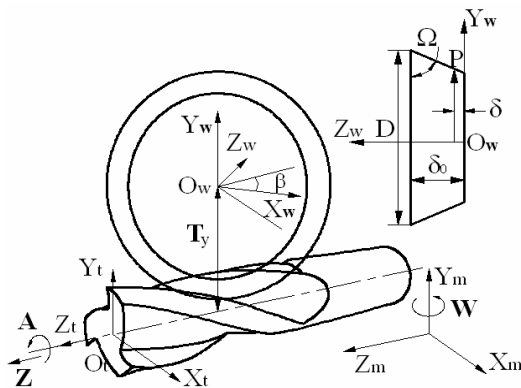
Schematic for helical fluting grinding process and grinding wheel geometry parameters.
